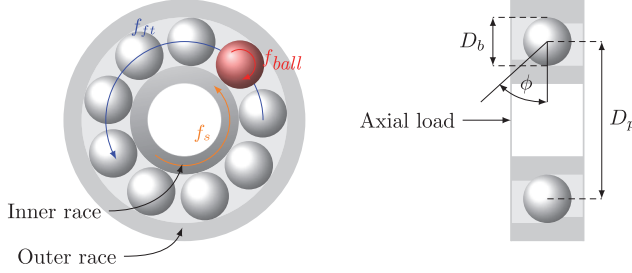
Frontal and axial cross sections of a ball bearing on the left and right, respectively.
